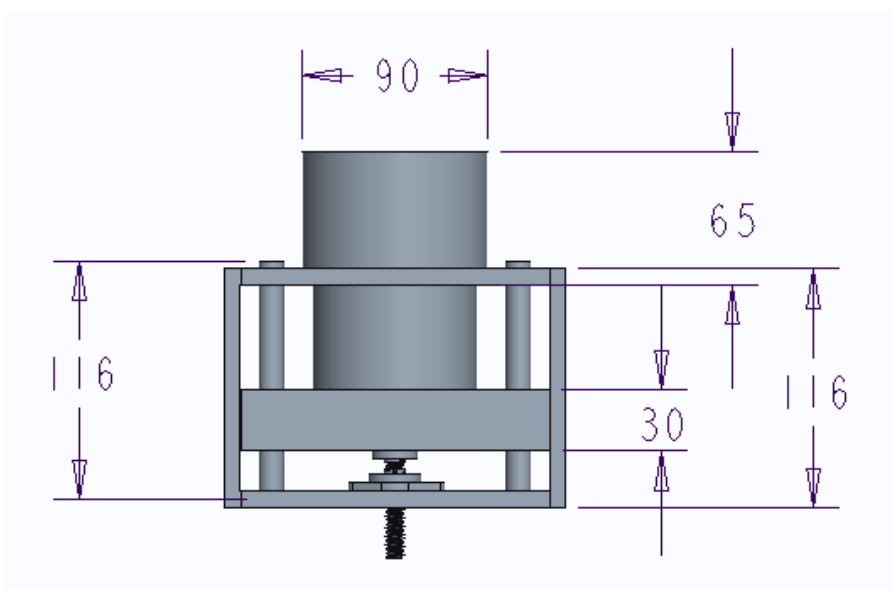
Z Axis Mechanism CAD Model Front View (mm)
